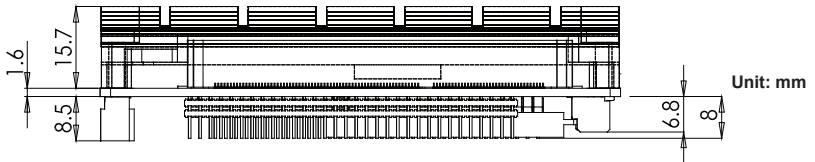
MIO-3260 Mechanical Drawing (Side View with Heatsink)
